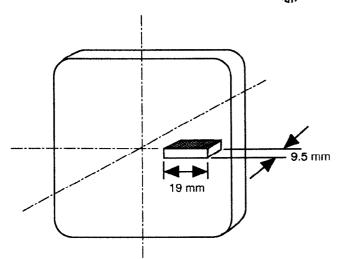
Specimen from Large Bar or Billet for Microscopical Test
